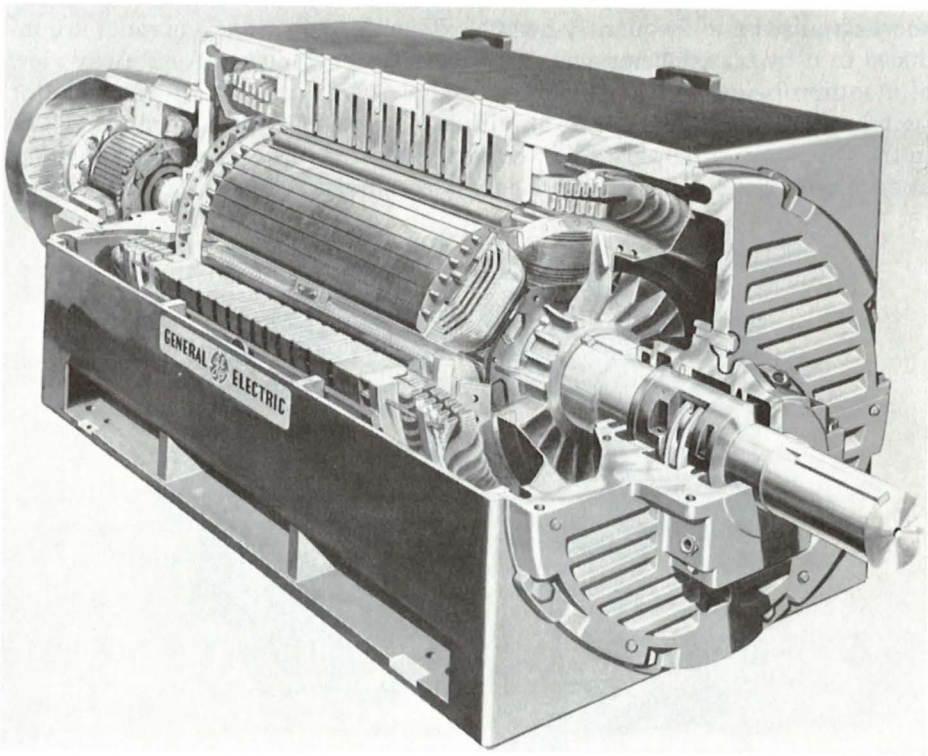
Cutaway view of a high-speed synchronous motor. The excitor shown on the left end of the rotor is a small ac generator with a rotating semiconductor rectifier assembly. (General Electric Company.)
